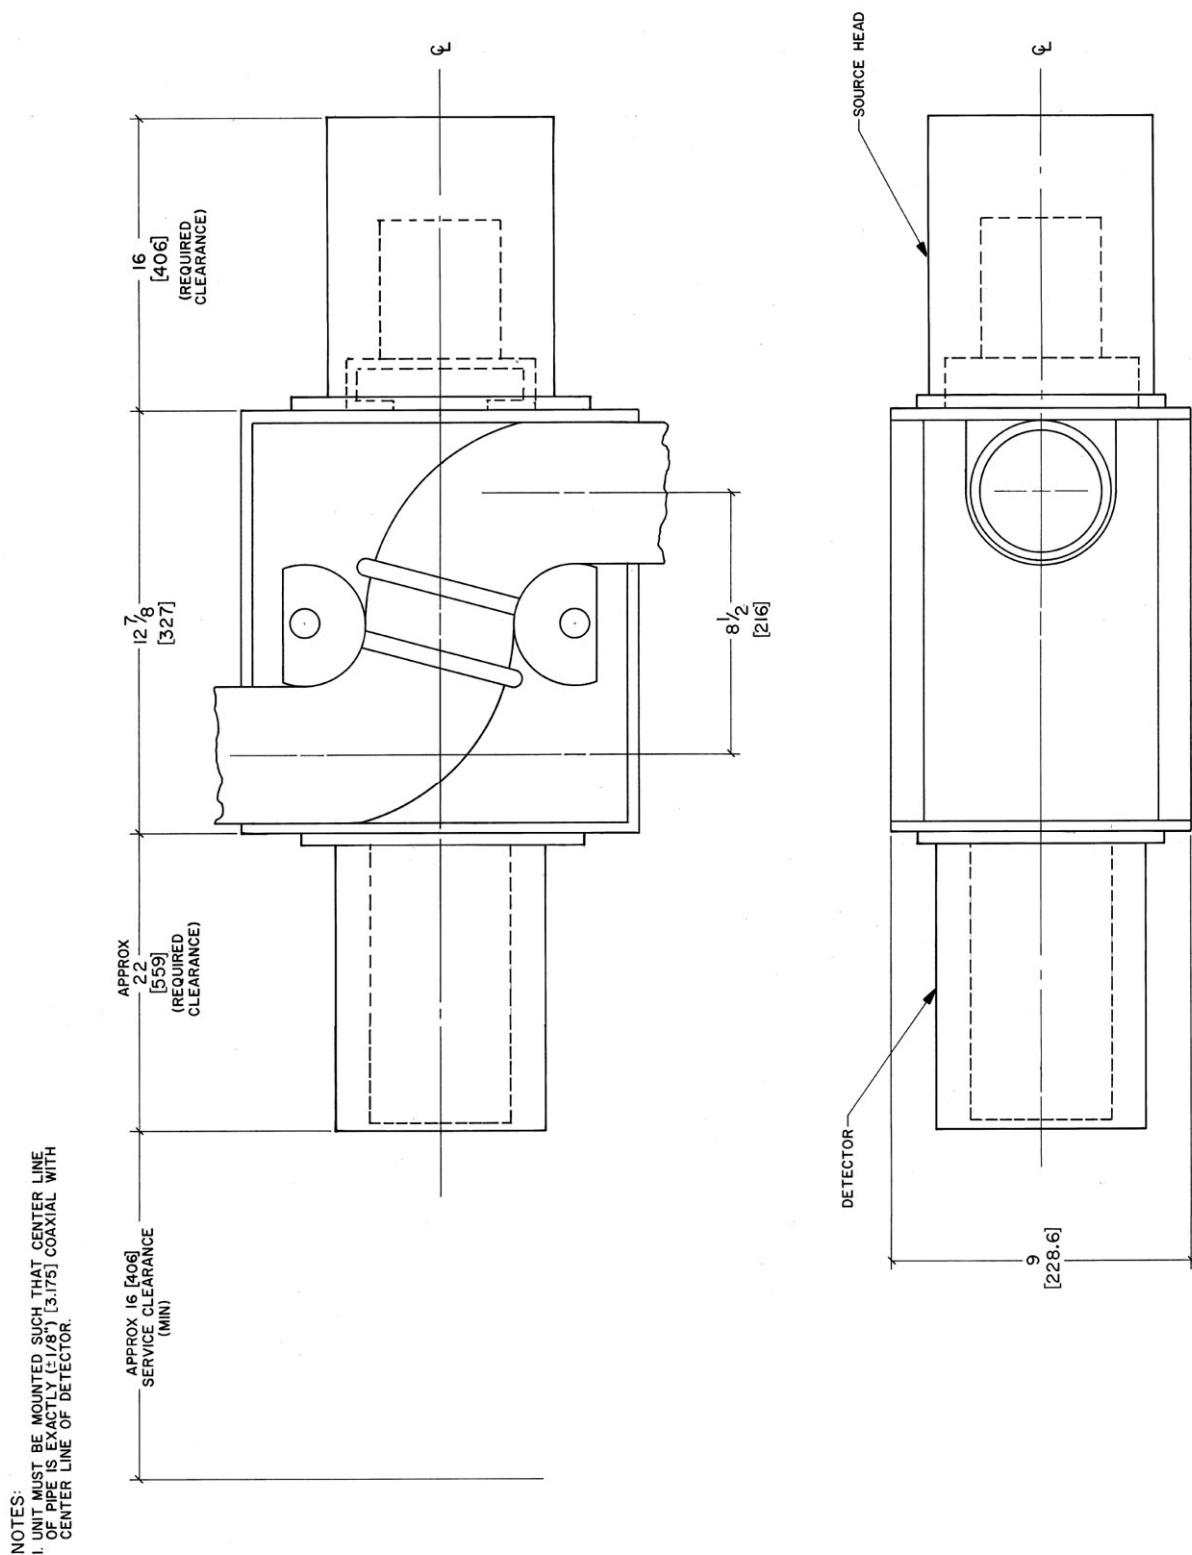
866705: Mounting dimensions, 4" Z-pipe mounting configuration (sheet 1 of 1)
